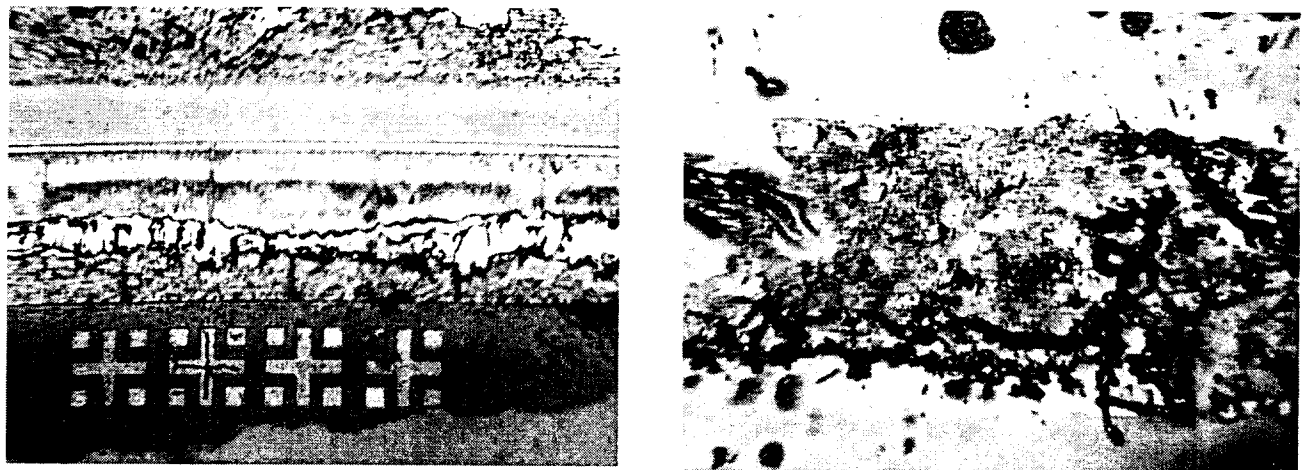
Picture of micro arc welding showing poly heater on the left and titanium coated Si cap wafer on right.
